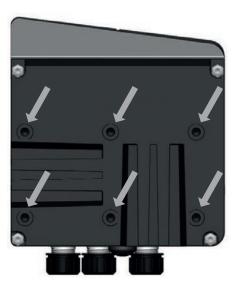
Six M4x5 threaded holes on the rear side of the device
